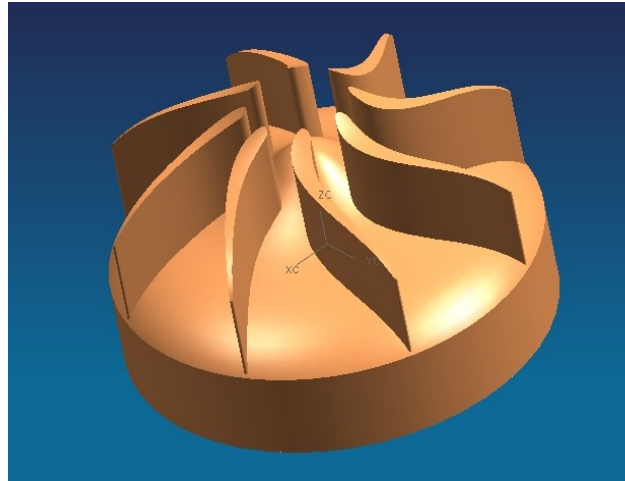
3D CAD data of impeller of pump Model 13 with 10 mm blade height
